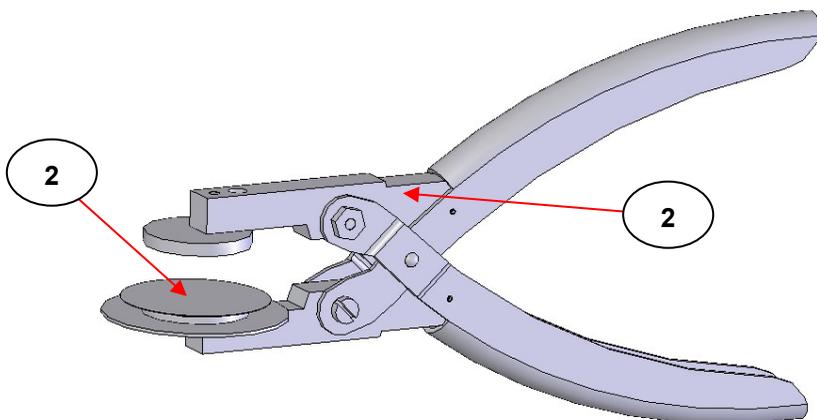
Foil Disc for Pressing in Sample Cup Tool to Make the Sample Cup Cover
